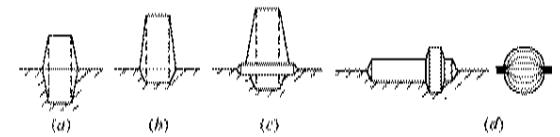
Drawings illustrating the design rules for positioning the die parting line on axisymmetric forgings so as to divide the forging to two equal halves as shown in (a) and (d)
